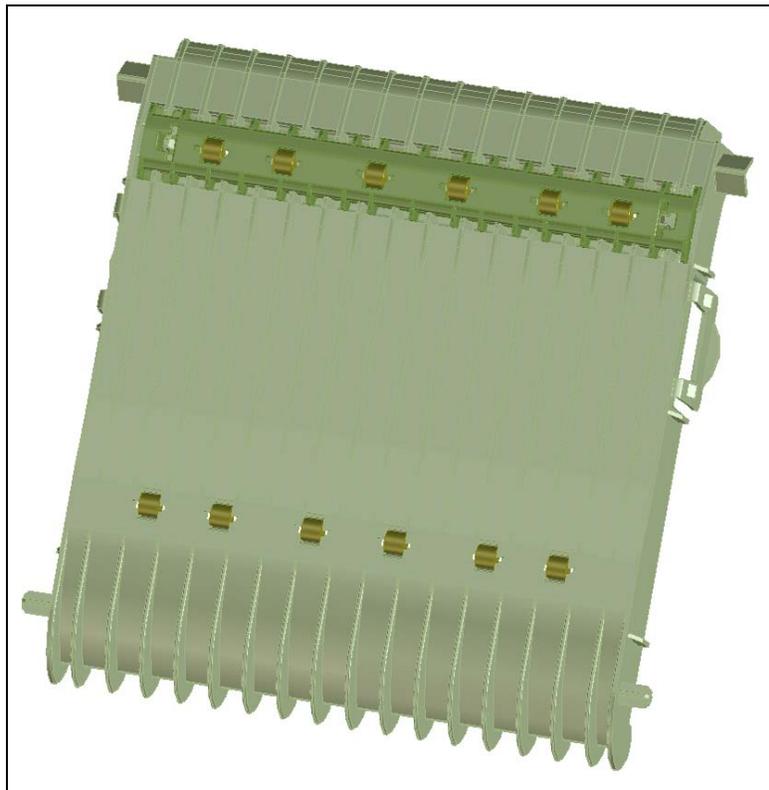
Reversible Roller Guide Installed in Top Cleanout
